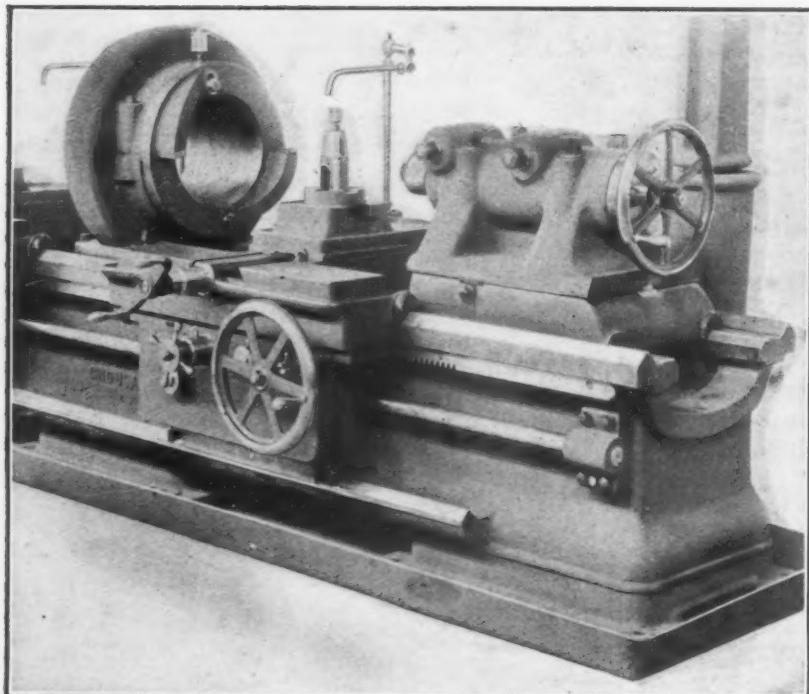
A View Showing the Bearing of the Apron Upon a Third V on the Bed.
